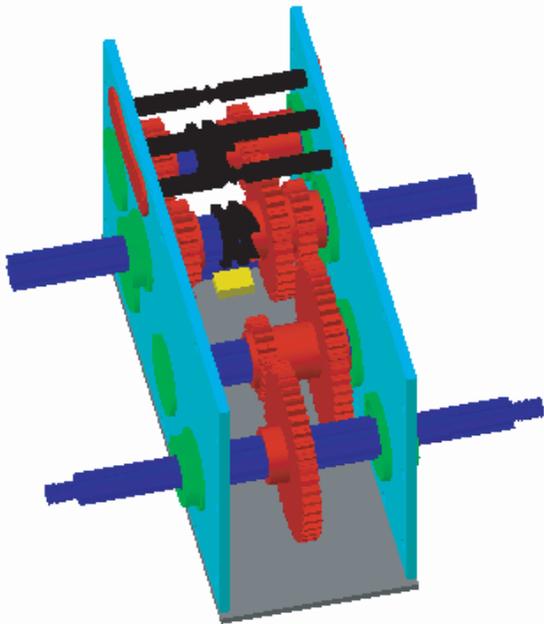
Gearbox of BRRRI self-propelled reaper.
